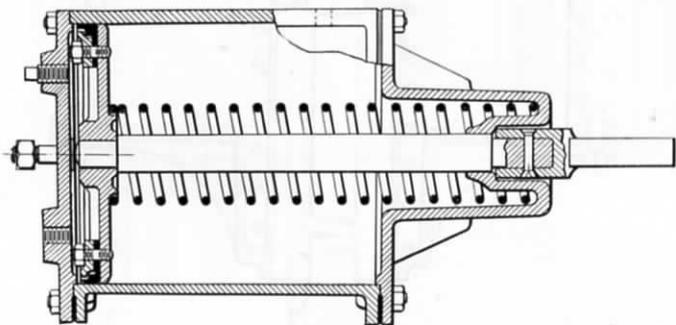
BRAKE CYLINDER, HORIZONTAL TYPE.
